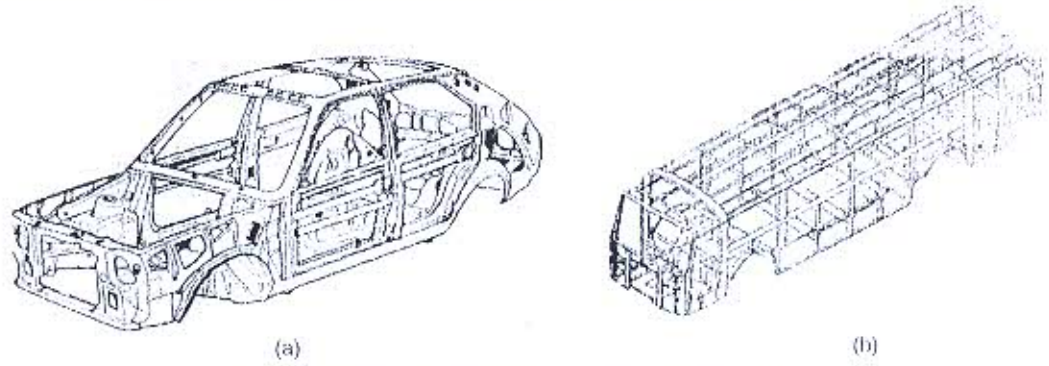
Unitized body designs: (a) passenger car and (b) bus
